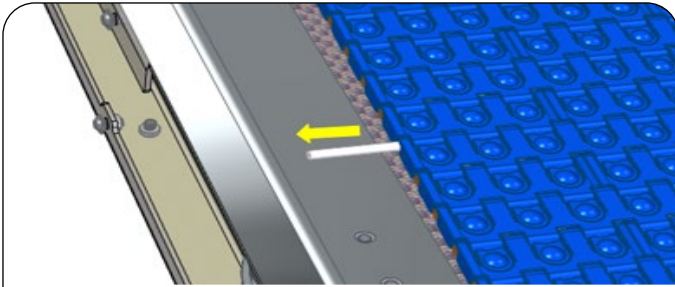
Removing/inserting pin from Roller Top Belt link
